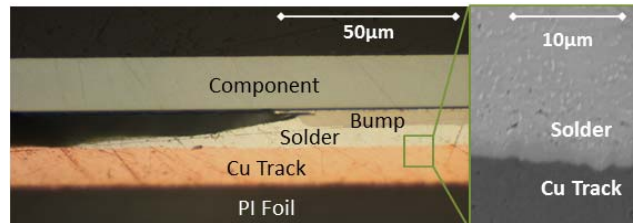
Cross section of solder joint for 20- μm -thick 1 mm \times 1mm chip with 4 I/Os soldered on PI-Cu substrate soldered using 4.3 J/cm² pulse.
